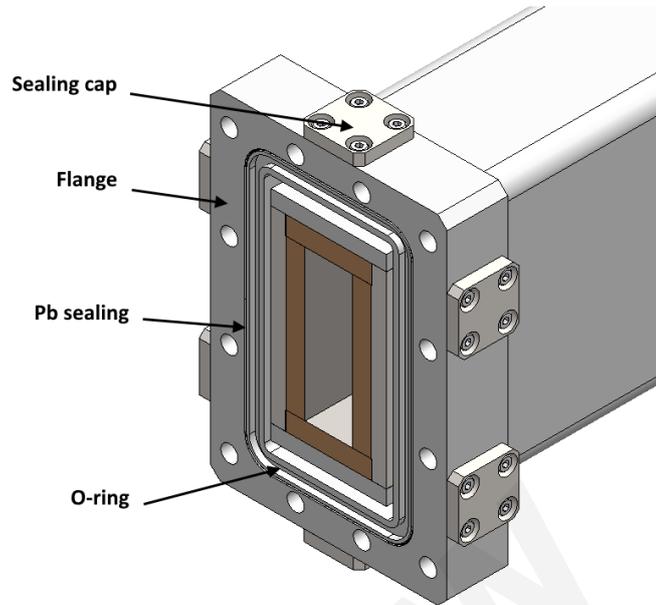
Section view showing the Pb sealing wire and NBR O-ring in the flange.
